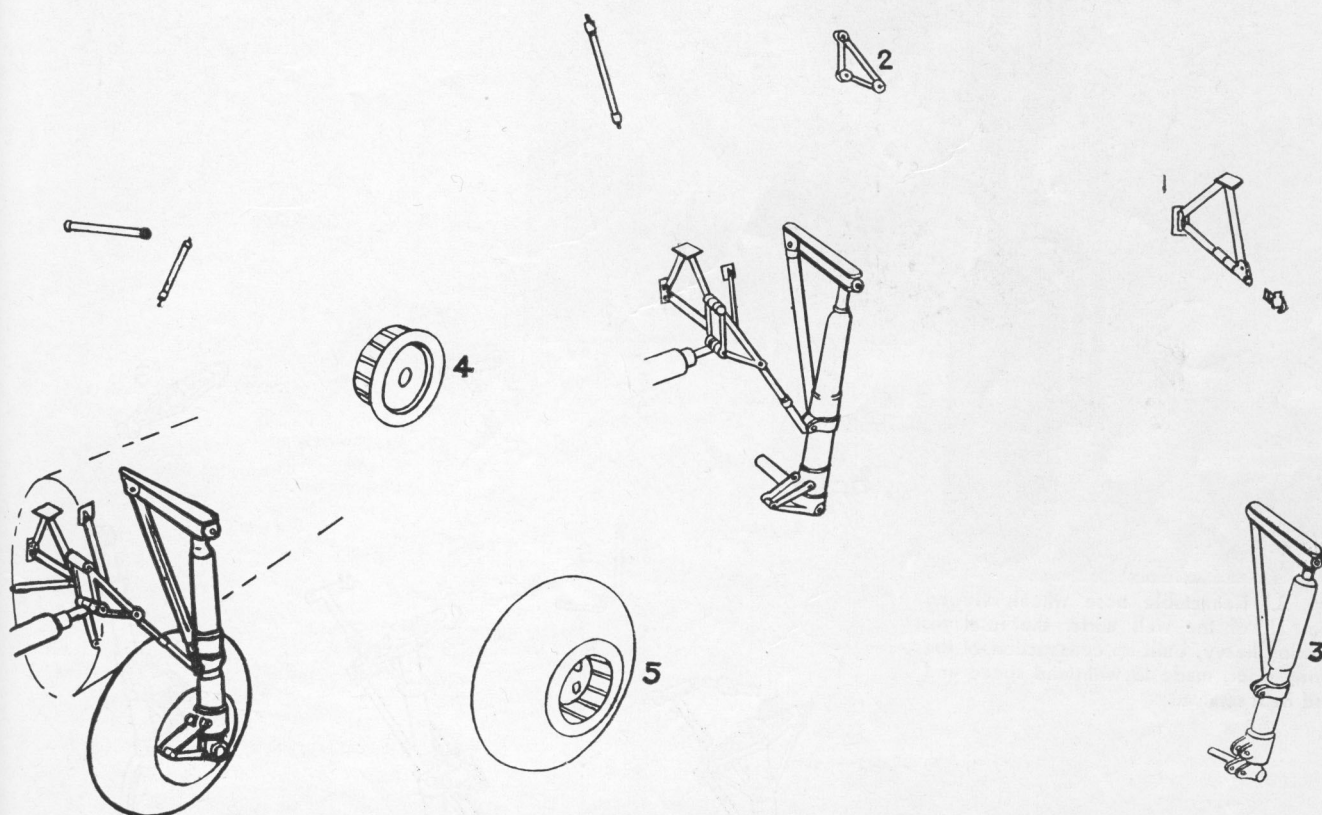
The hydraulically operated main landing gear retracts up and back into wells in the forward booms. Details shown here include: (1) boom support pivot; (2) drag link; (3) main gear assembly; (4) brake; (5) wheel.
